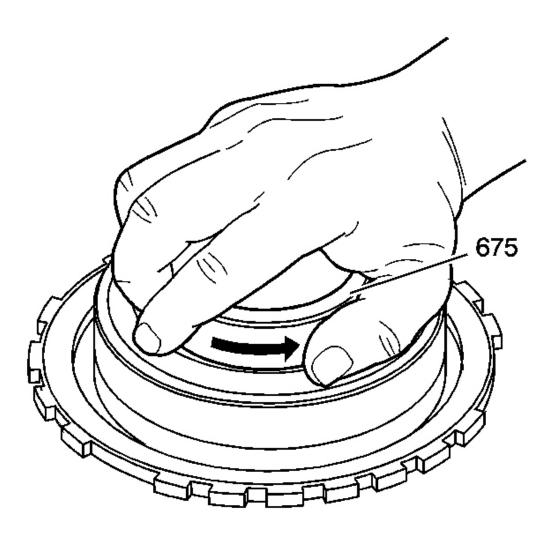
Identifying Low & Reverse Roller Clutch Assembly Courtesy of GENERAL MOTORS CORP.
